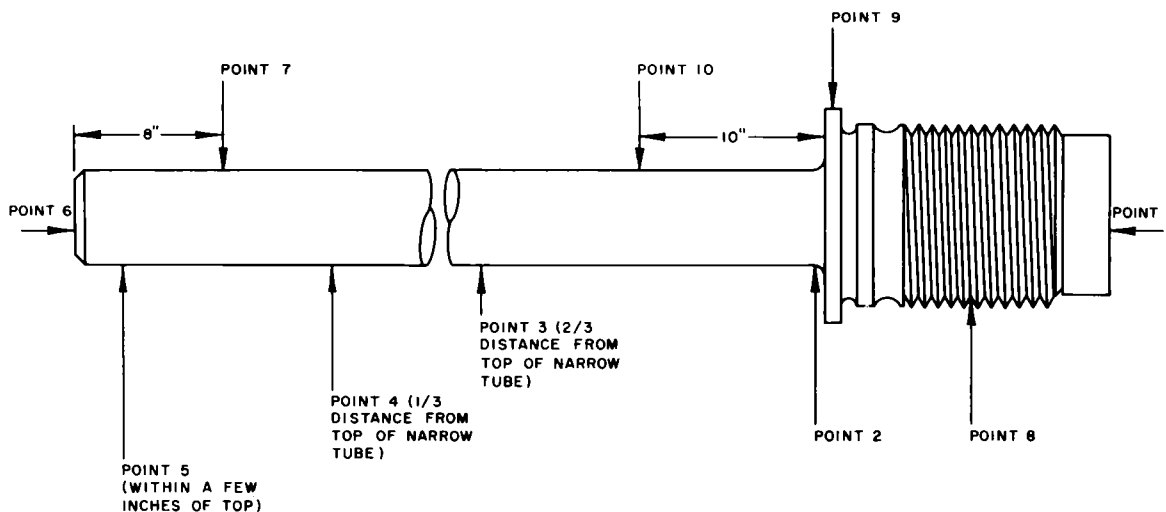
Mechanism Motor Tube — Guide Tube Assembly Radiation Survey Points.
